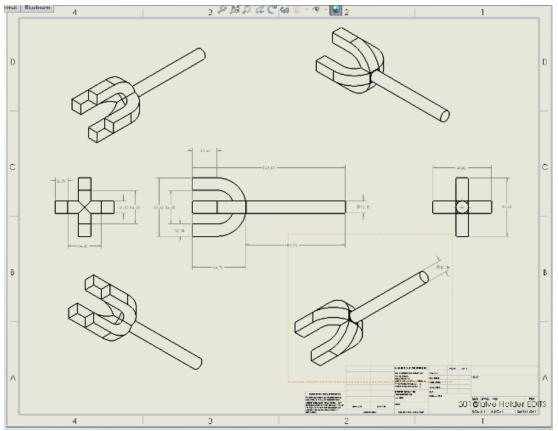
Edited Part Drawing with dimensions (in mm)
